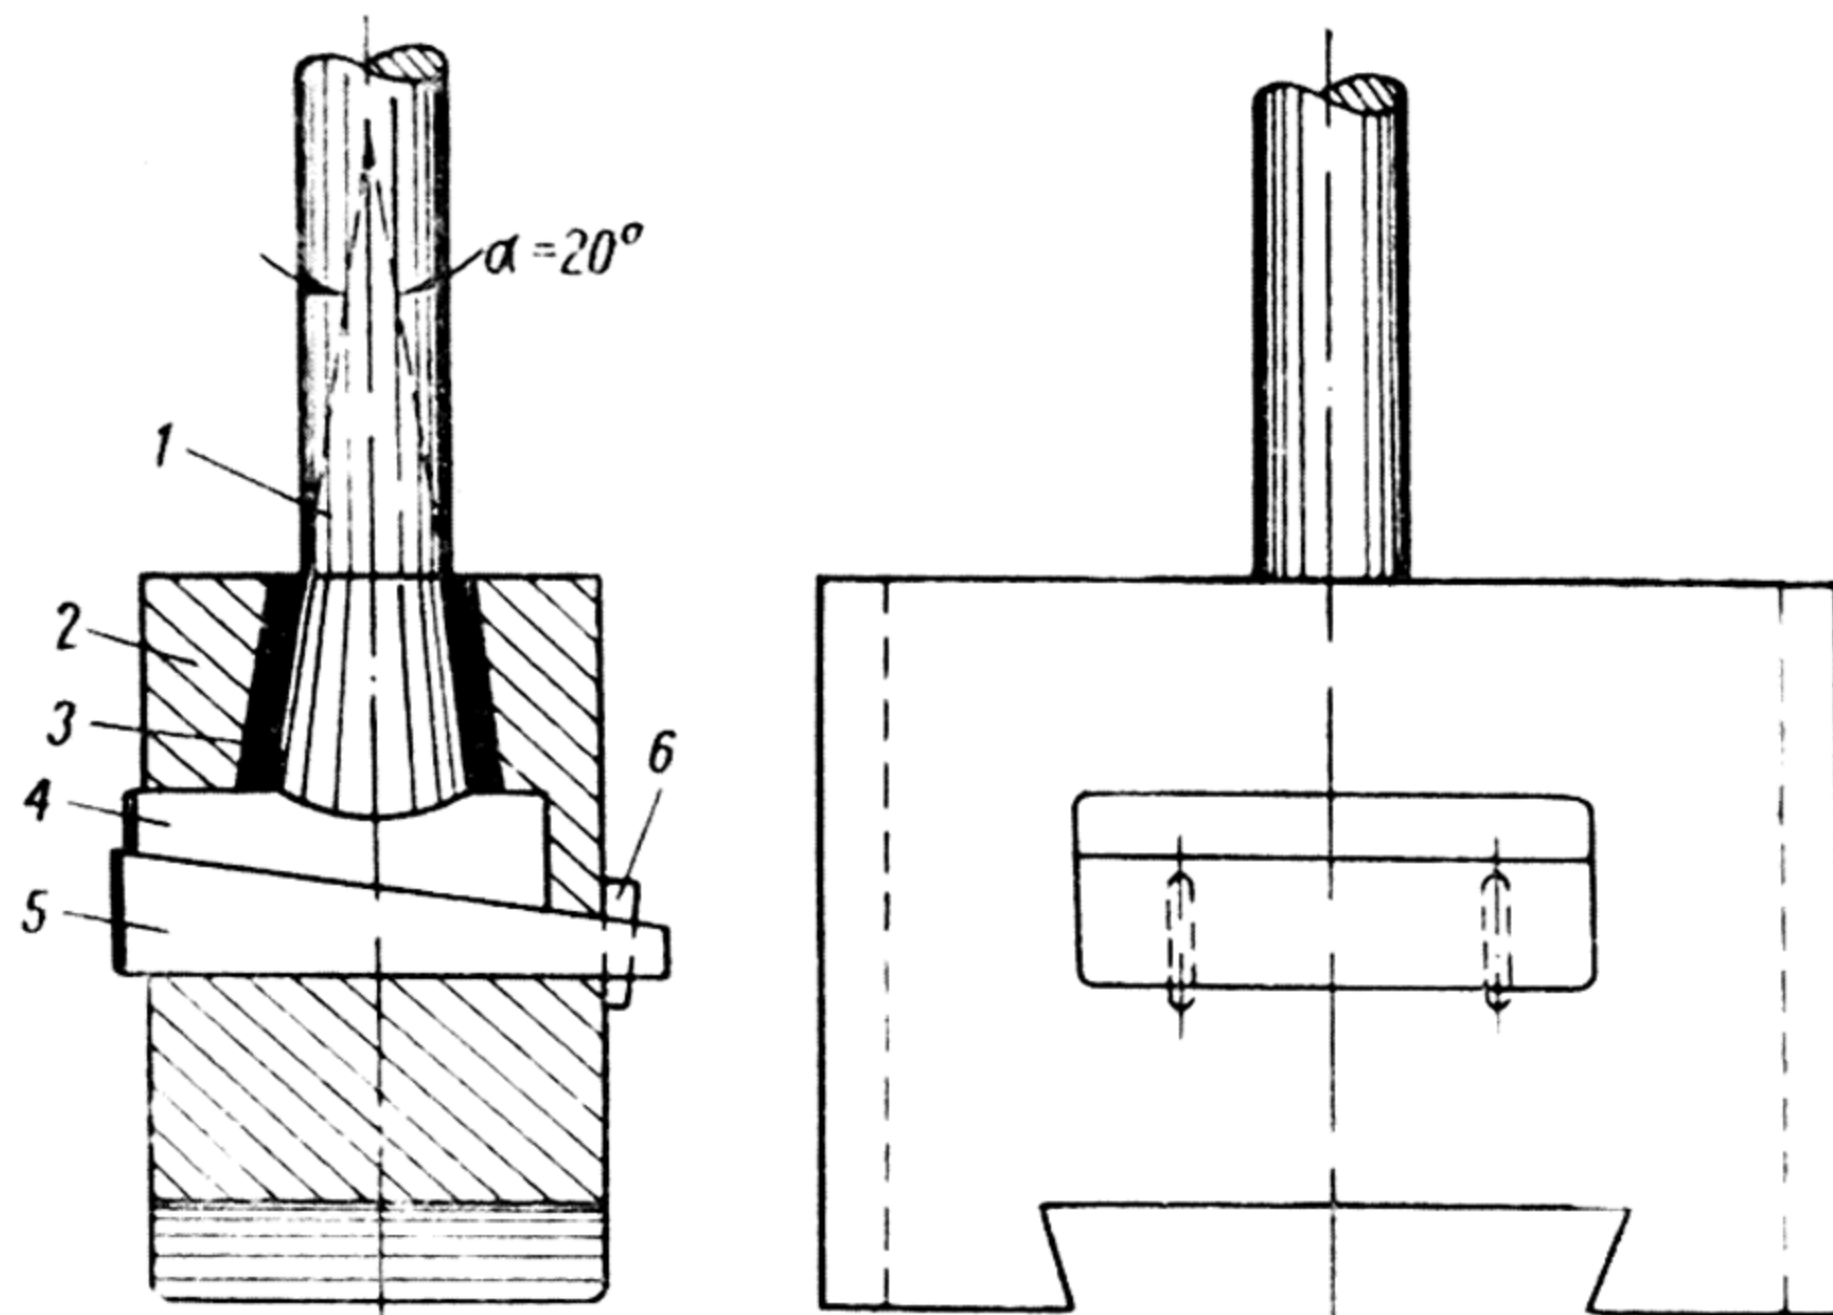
Dismountable assembly of piston rod with ram of hammer
